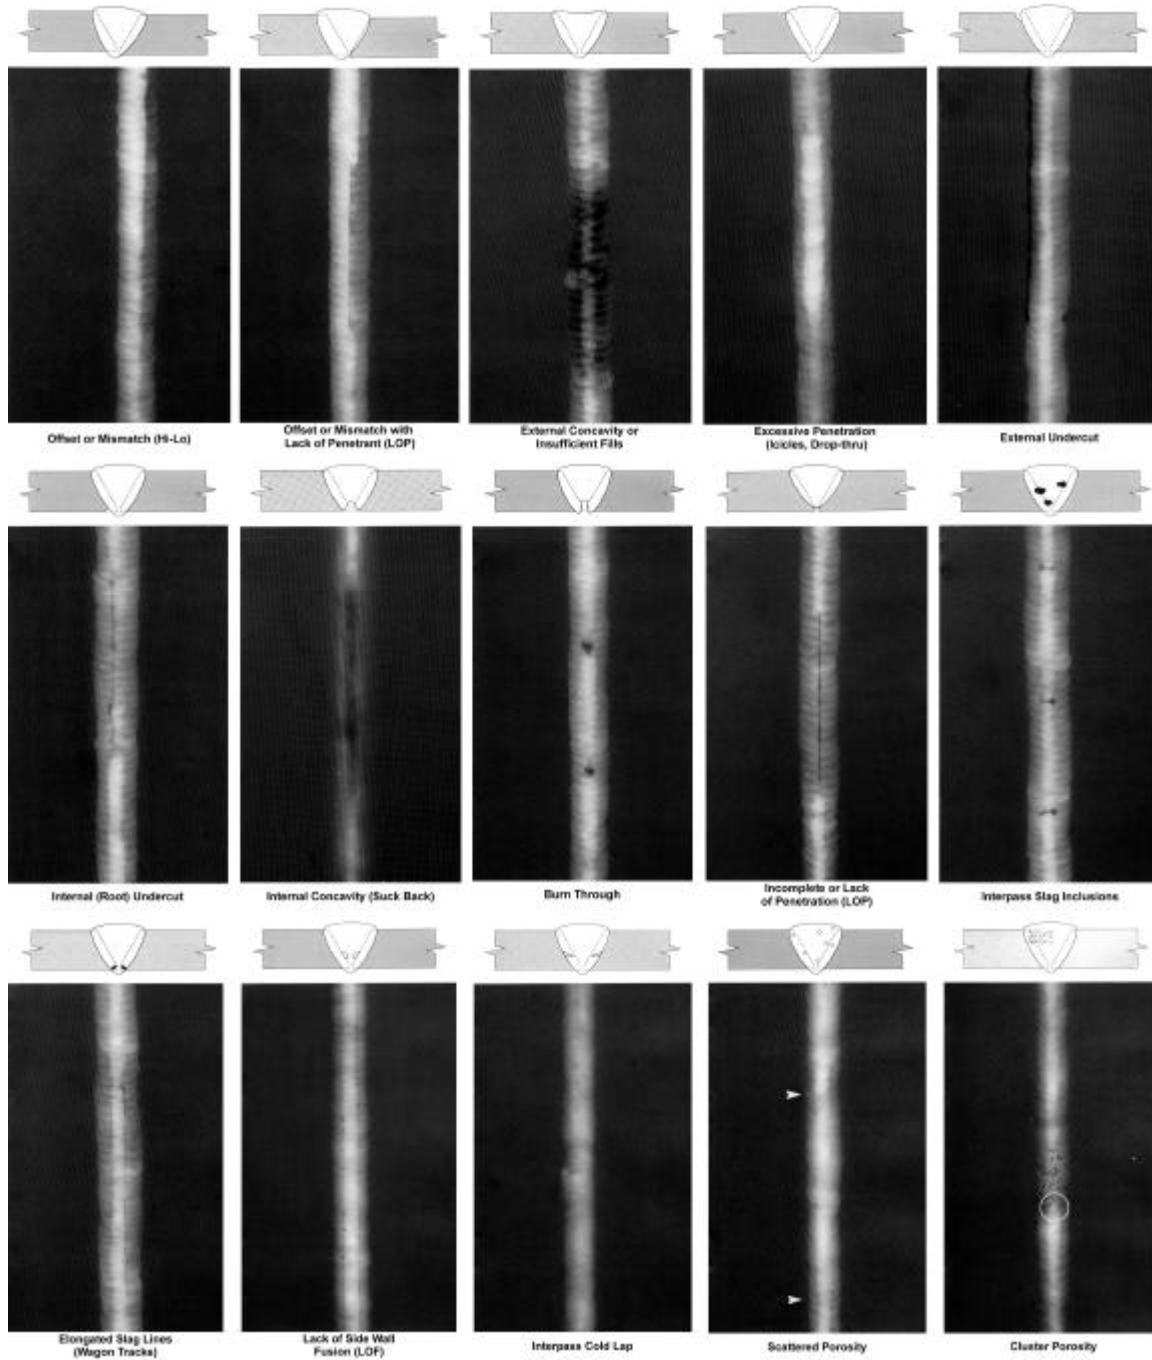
Radiographic Examples of Welds (Sheet 1 of 2)
